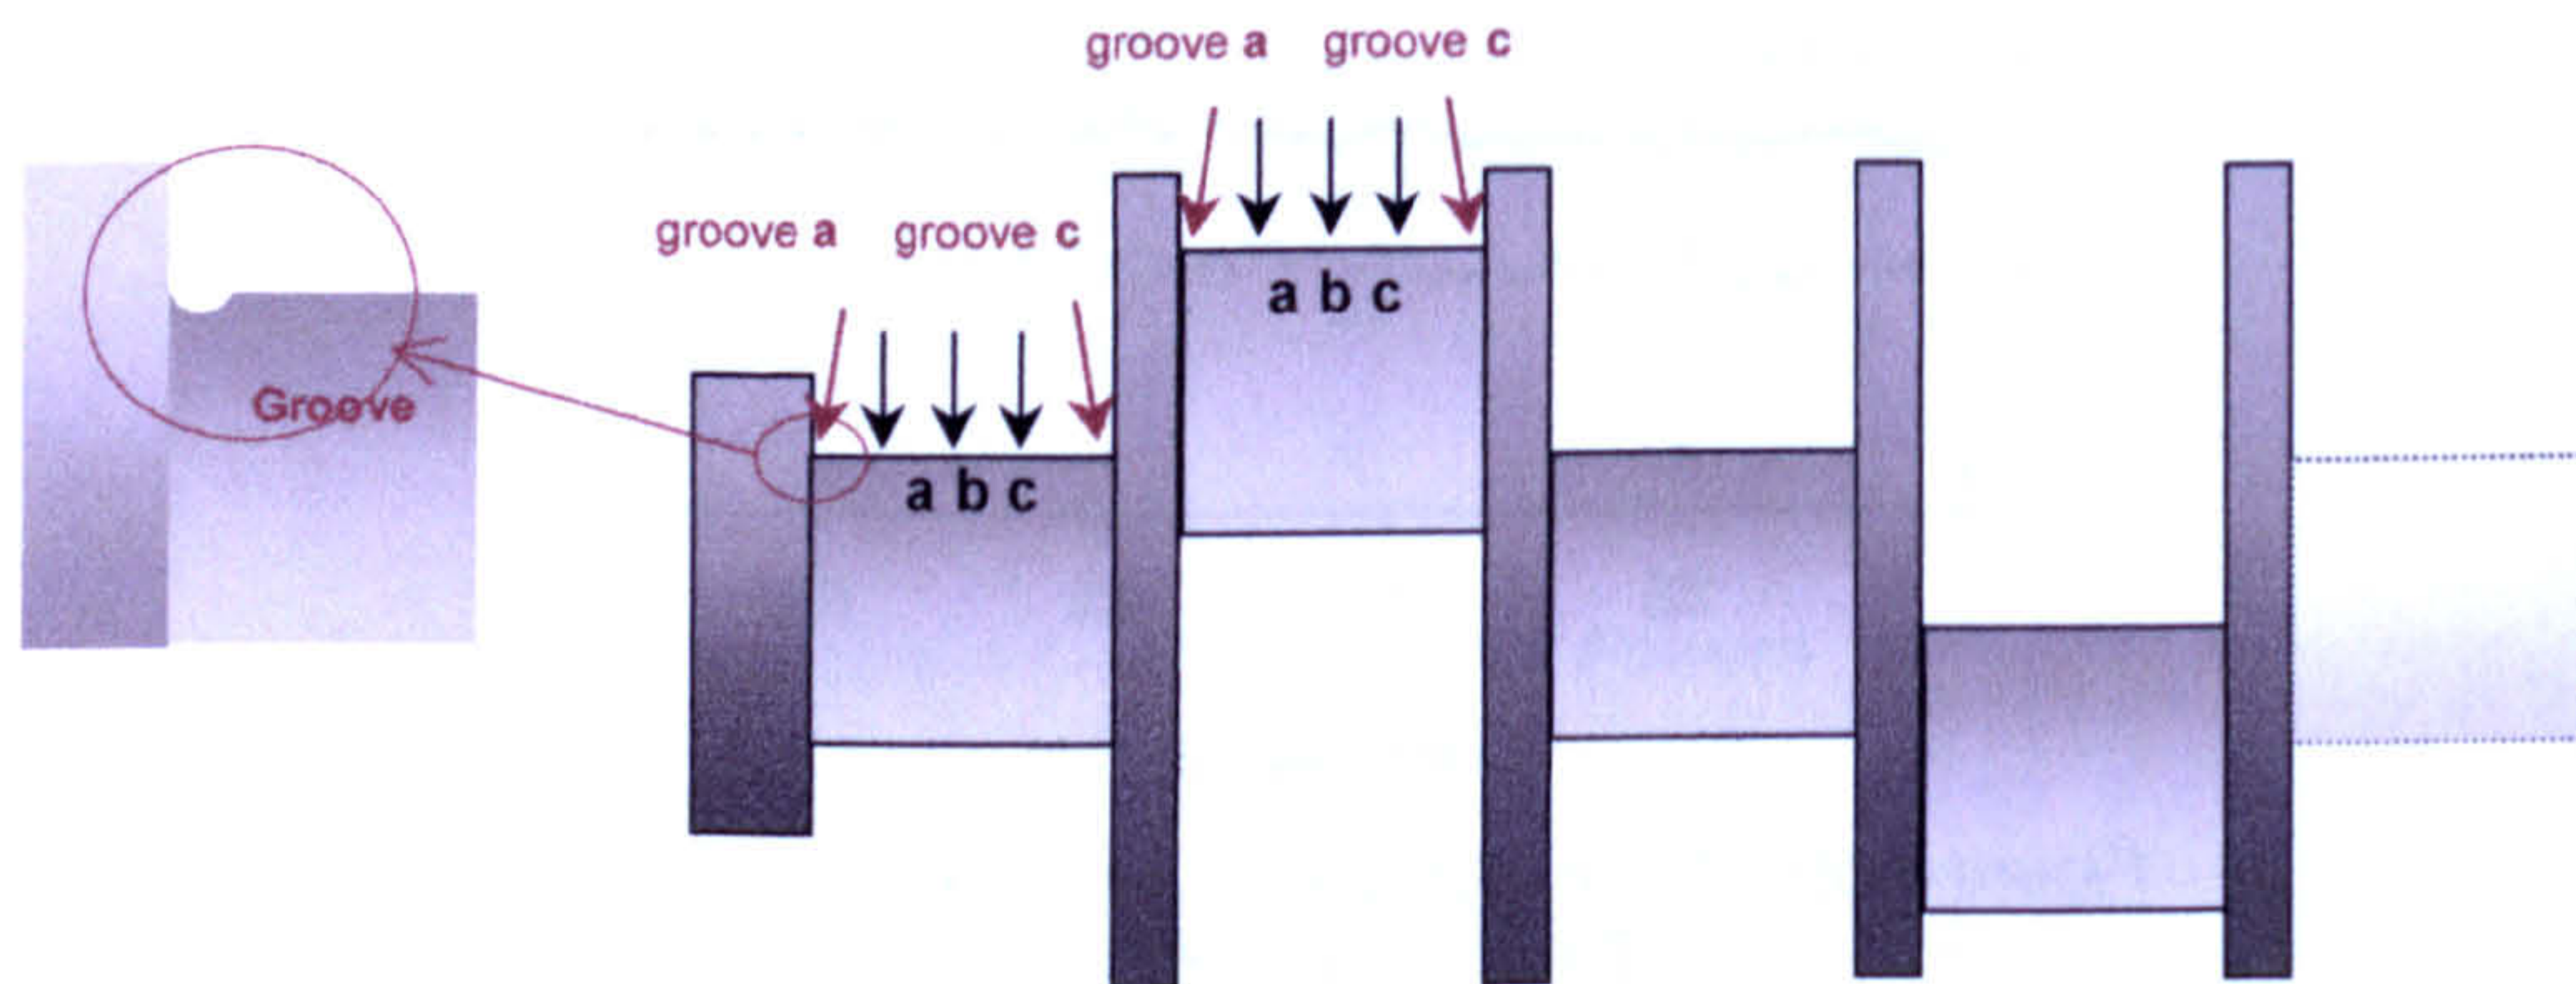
Crankshaft Residual Stress Measurement Zones
